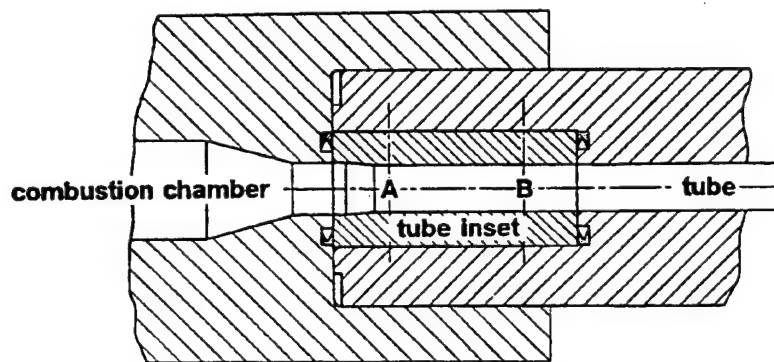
Gun tube set-up of 20-mm-caliber device
